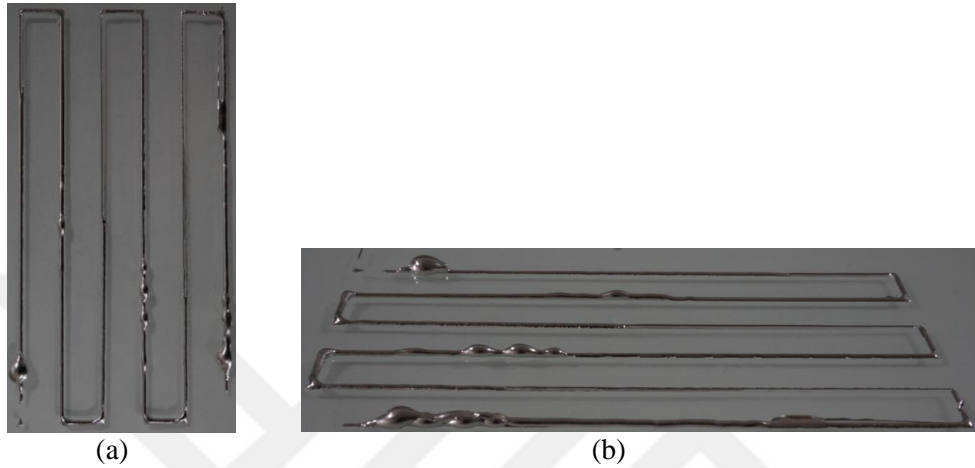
Image of the sample printed at printing speed: 100 mm/min, extrusion multiplier: 4, layer thickness: 0,2 mm, table temp: 75 °C and extrusion temperature 170 °C a) top view and b) side view
